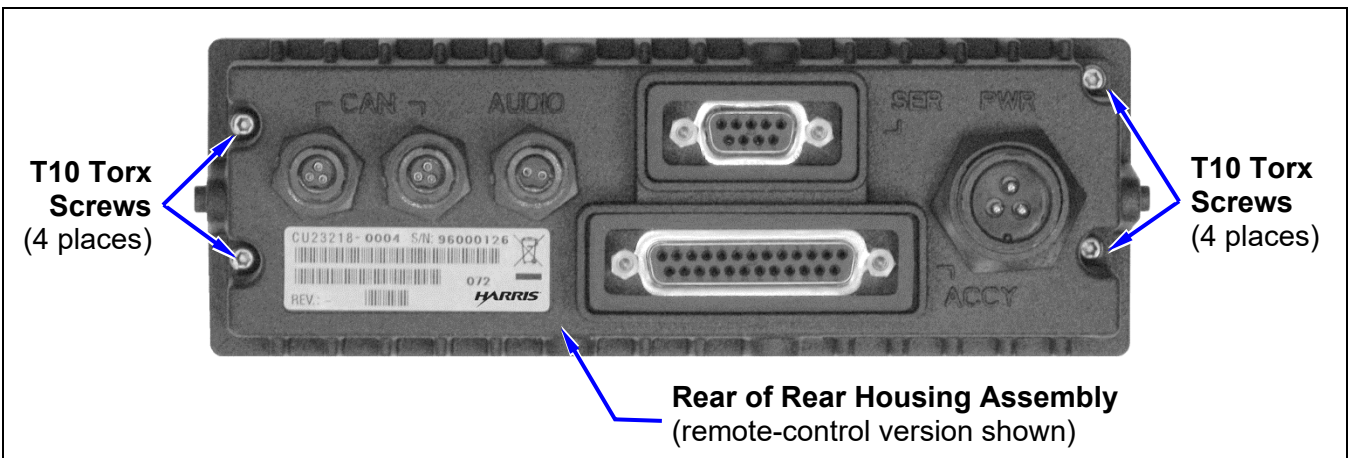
Separating/Mating Front Cover Assembly and Rear Housing Assembly (Torx Screws at Rear)
